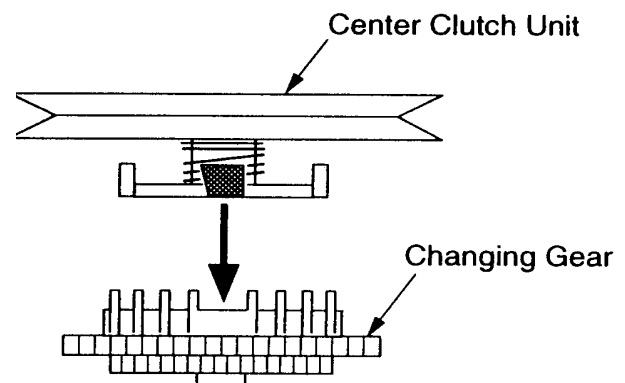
Center Clutch Unit/Changing Gear Spring/Changing Gear/Changing Lever-B/Idler Arm Unit Removal
